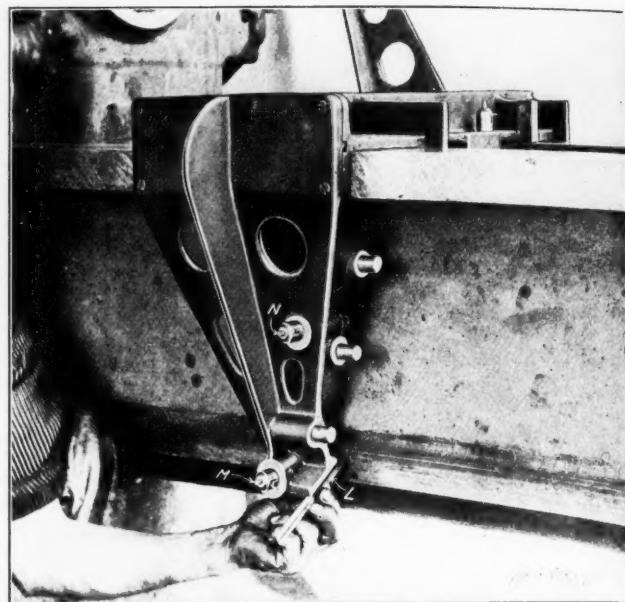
Testing the Bevel Bearing Surface for the Cross-slide Carriage Support.
